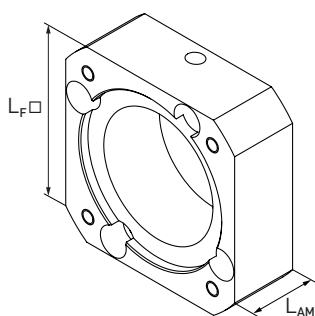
Motor adapter plate AM for linear modules HM-B, linear tables HT-B and cantilever axes HC without gears
